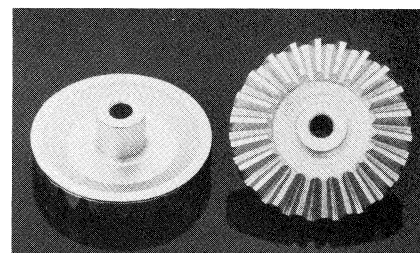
An eight cavity tool was used to produce the 200 gears required. The tooling cost was \$420.00 for the rubber tool, and yielded 240 castings at a piece part price of \$6.60. Eight metal models were needed to produce the tool.
